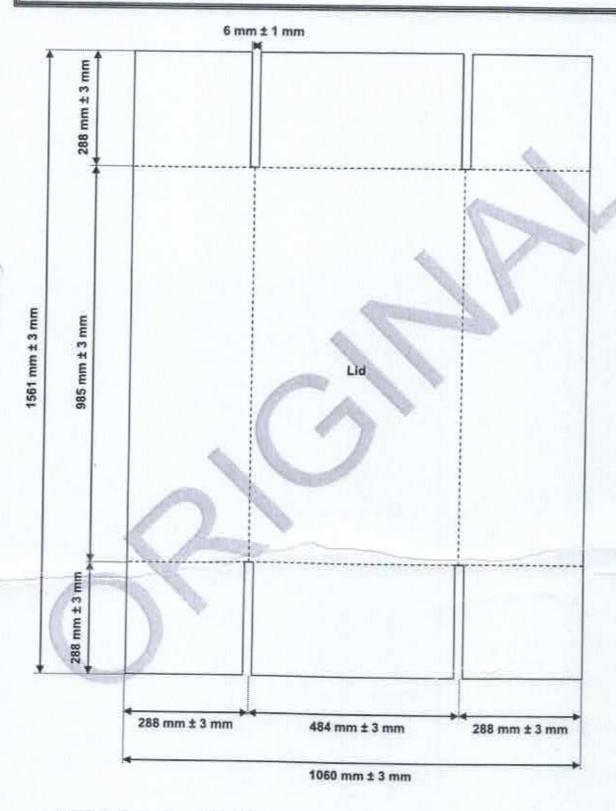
Dimensions of the lid component of the telescopic board box (flat measurements)
